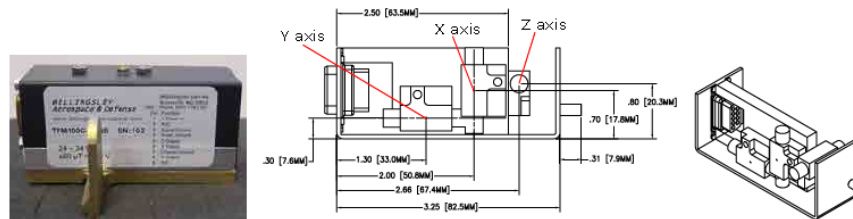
Left : Engineering model of the Billingsley triaxial fluxgate magnetometer selected for LISA Pathfinder. Center and Right : mechanical drawing of the inner sensor heads (X, Y and Z axis) [3]
